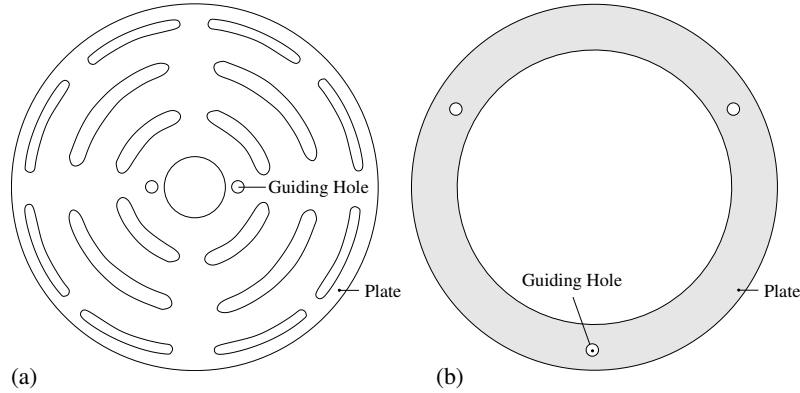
Guiding holes in valve plate: (a) compressor valve, (b) model valve.
